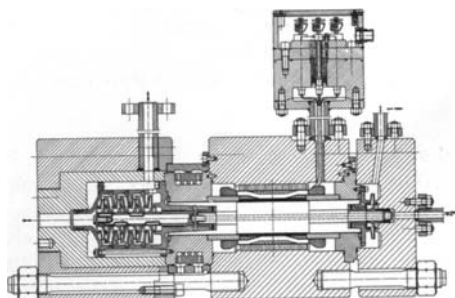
Sectional view of a multi-stage high-pressure canned-motor centrifugal pump for pumping of an aggressive suspension at 70 MPa inlet pressure and 250°C.
